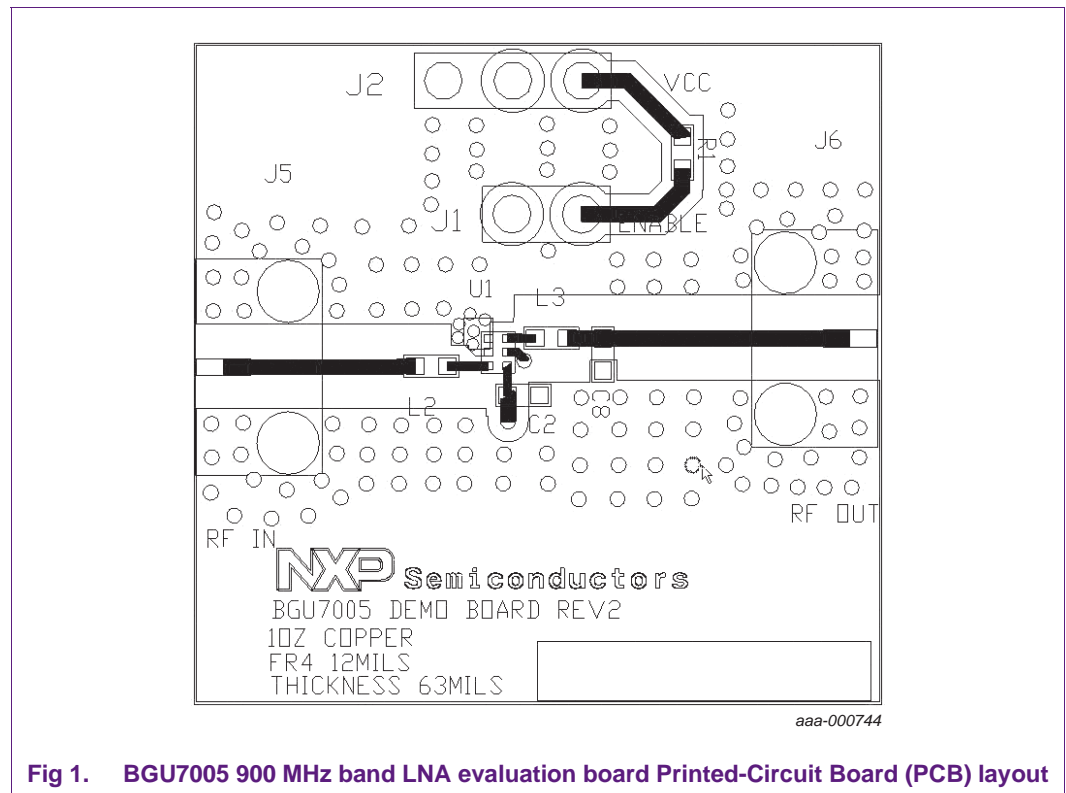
BGU7005 900 MHz band LNA evaluation board Printed-Circuit Board (PCB) layout
